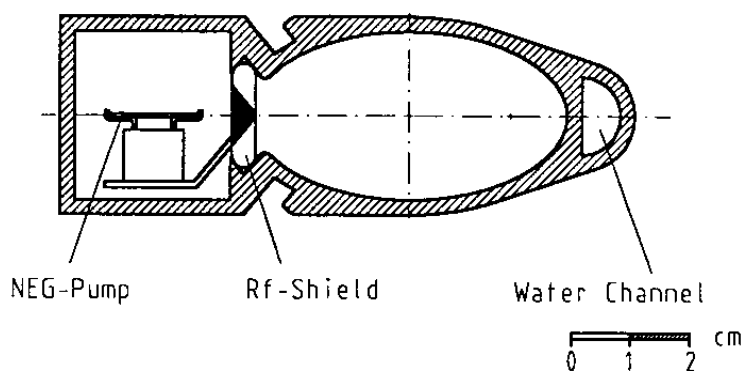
Tentative layout of the vacuum chamber through the dipole magnets in the arcs of the damping ring. Integrated pumps are installed in a separate pump channel. The chamber is water cooled.
